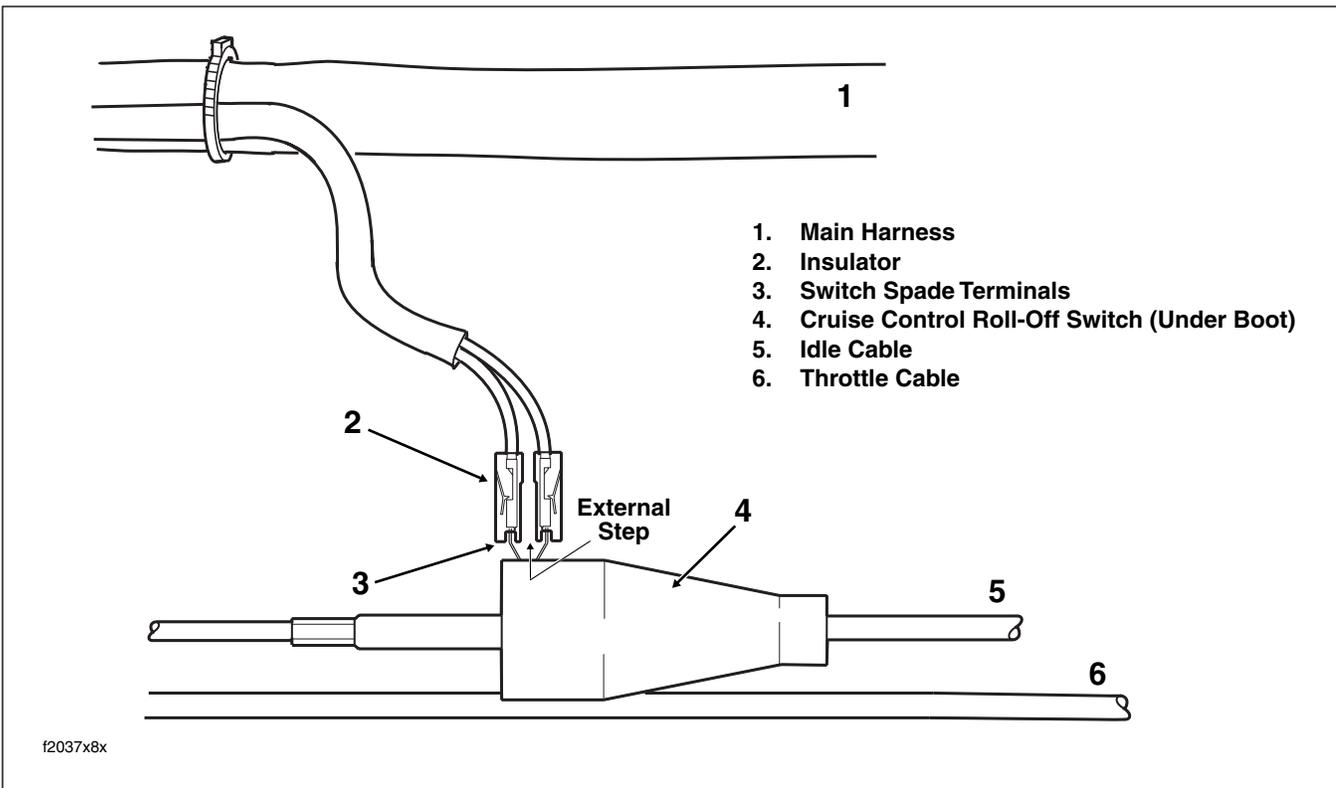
Throttle/Idle Cable Configuration (Right Side View)
